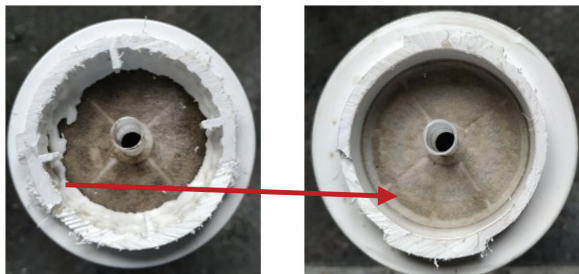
a) Current manufacturing activated carbon filter, and b) weld joint profile developed activated carbon filter
